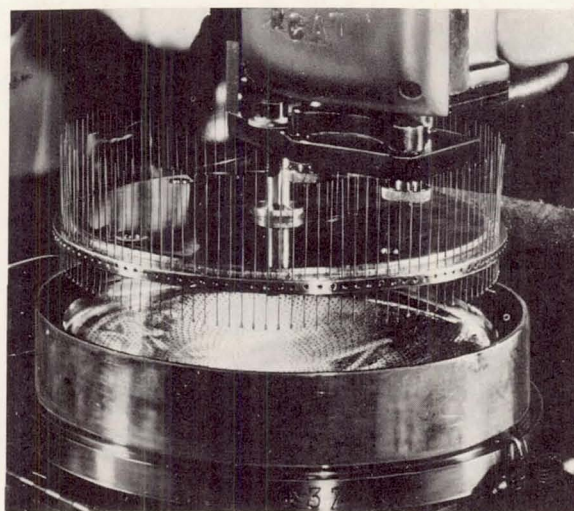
Closeup view of multiple drilling. Electric-discharge machining.
